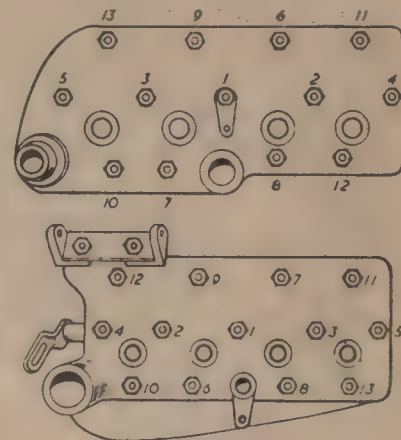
The cylinder-head nuts should be pulled down a quarter of a turn in rotation in the order indicated. The upper sketch shows the cylinder head fitted to the 1935 model and the Series 1 and 2 cars, while the lower is that used in the Series E engine.
